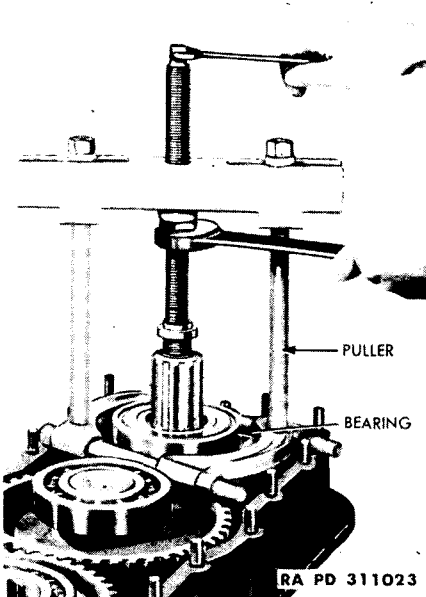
Removing Transfer Case Output Gear Bearing, Using Puller 41-D-2905-60
